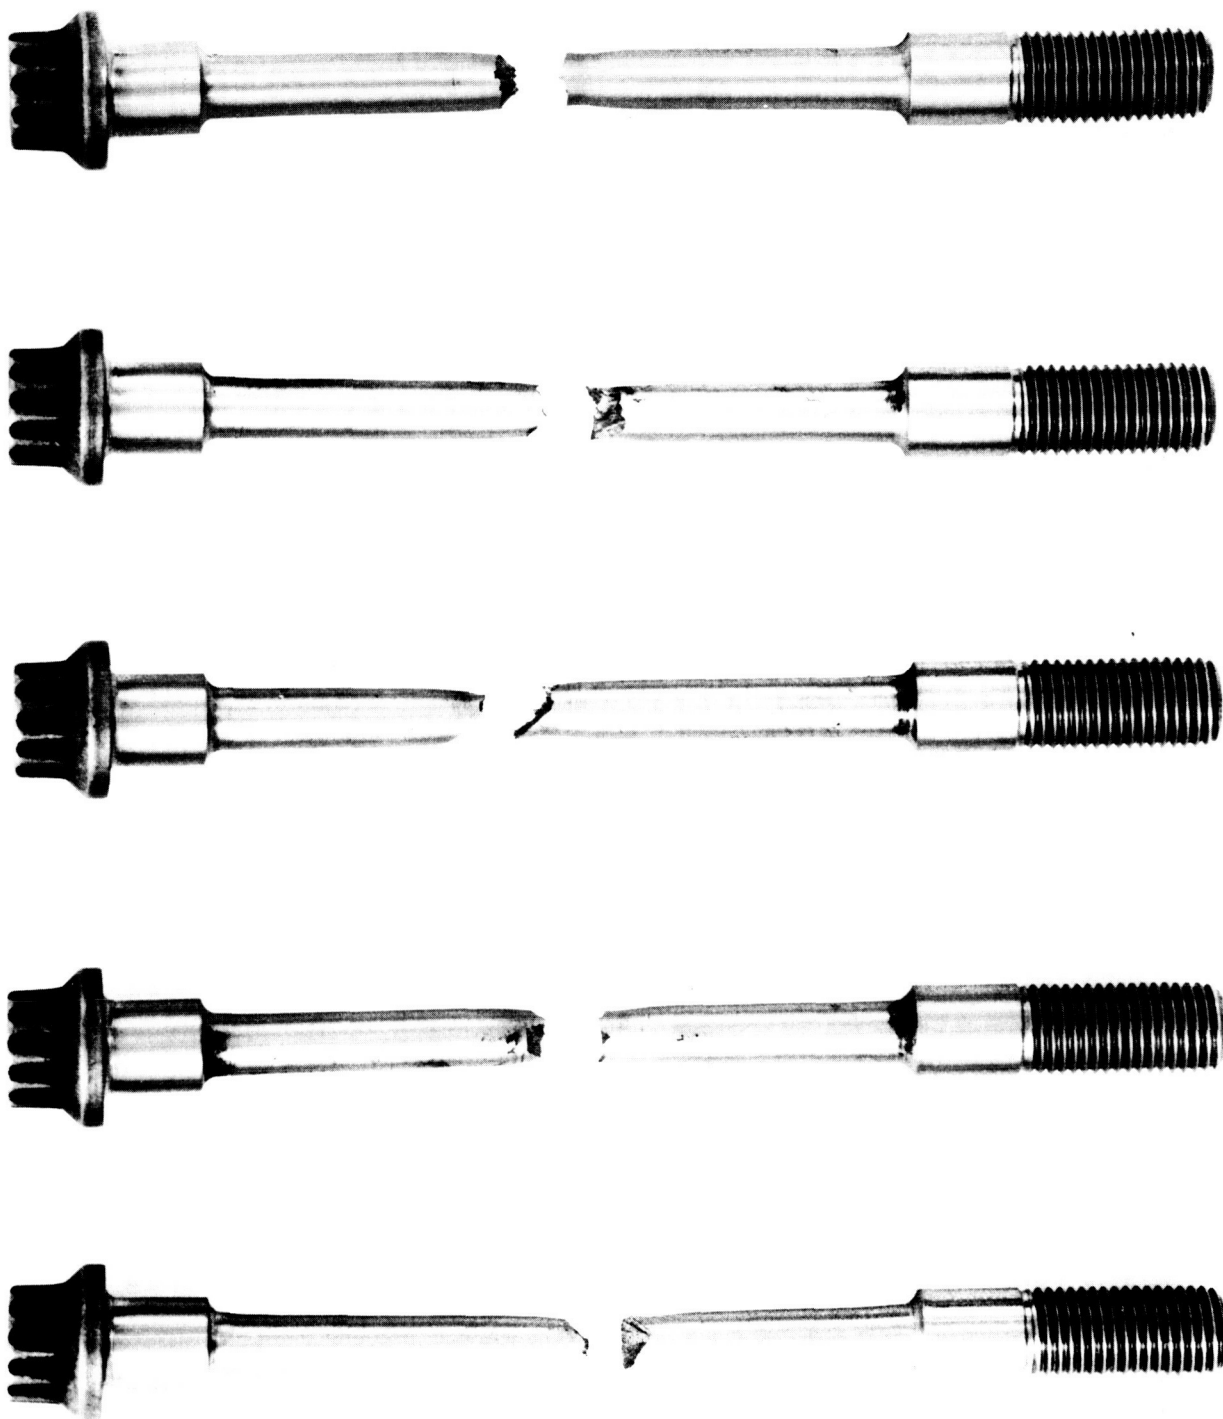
A A-286 REDUCED SHANK BOLT SPECIMENS
